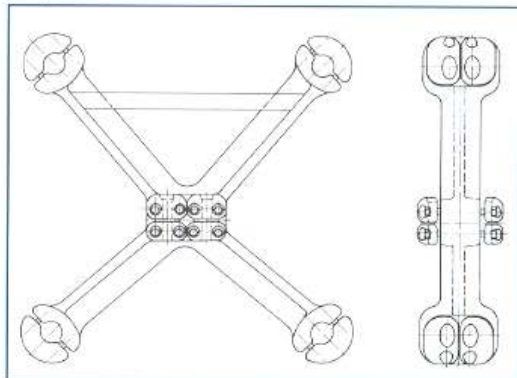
T-connector for outgoing bundles forming the overhead line.
